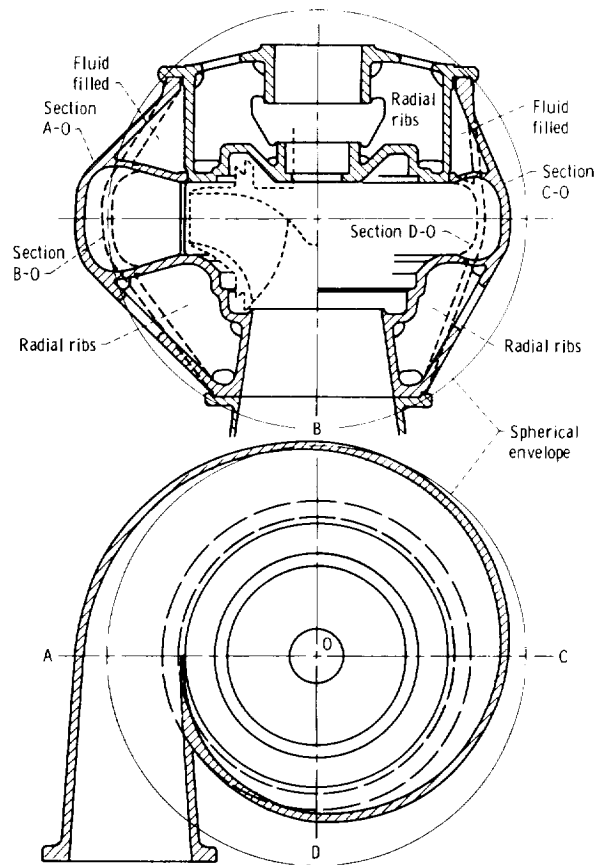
Single-volute casing reinforced against internal pressure by form of casing and cover.
